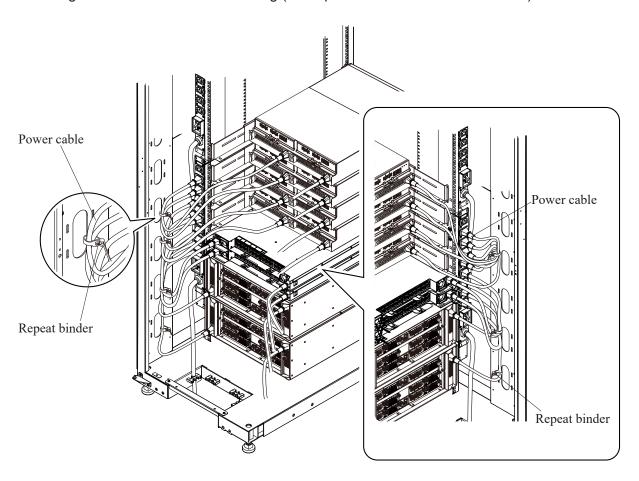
Connecting Power Cables to the RKU Rack Frame
